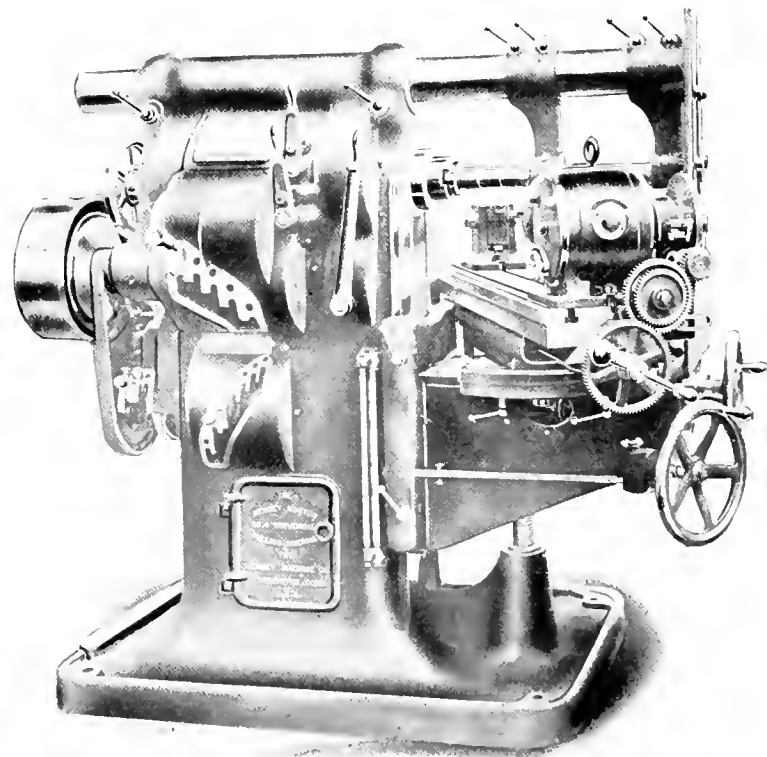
No. 4 Universal Milling Machine built by the Hendey Machine Co., Torrington, Conn.
